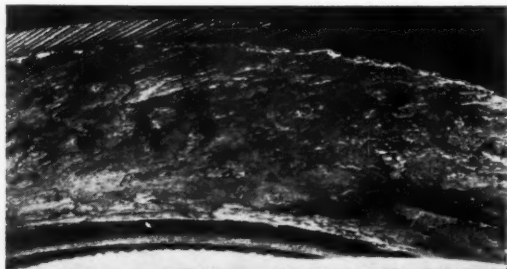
Failed pinion gear tooth surface due to welding after 3 mins. under load with straight mineral gear lubricant. High Torque-Low Speed Axle Test.
